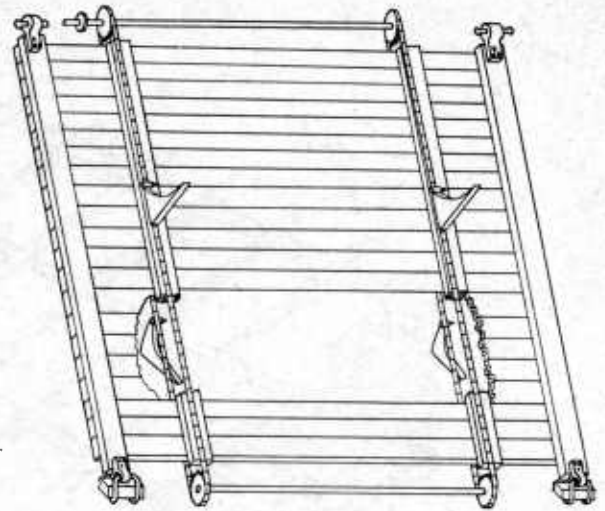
Jackladder for hoisting logs sidewise from pond to deck.
